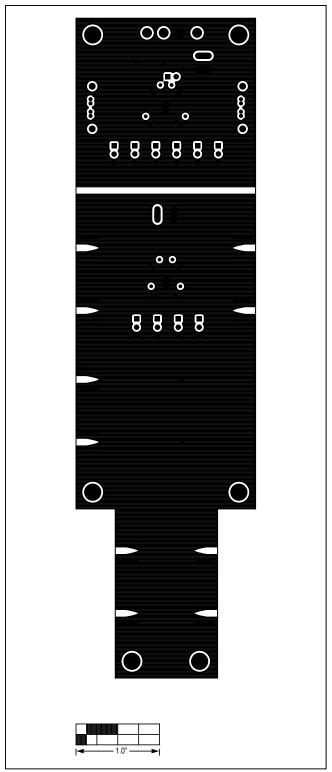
MAX14986 EV Kit PCB Layout—Inner Layer 2
